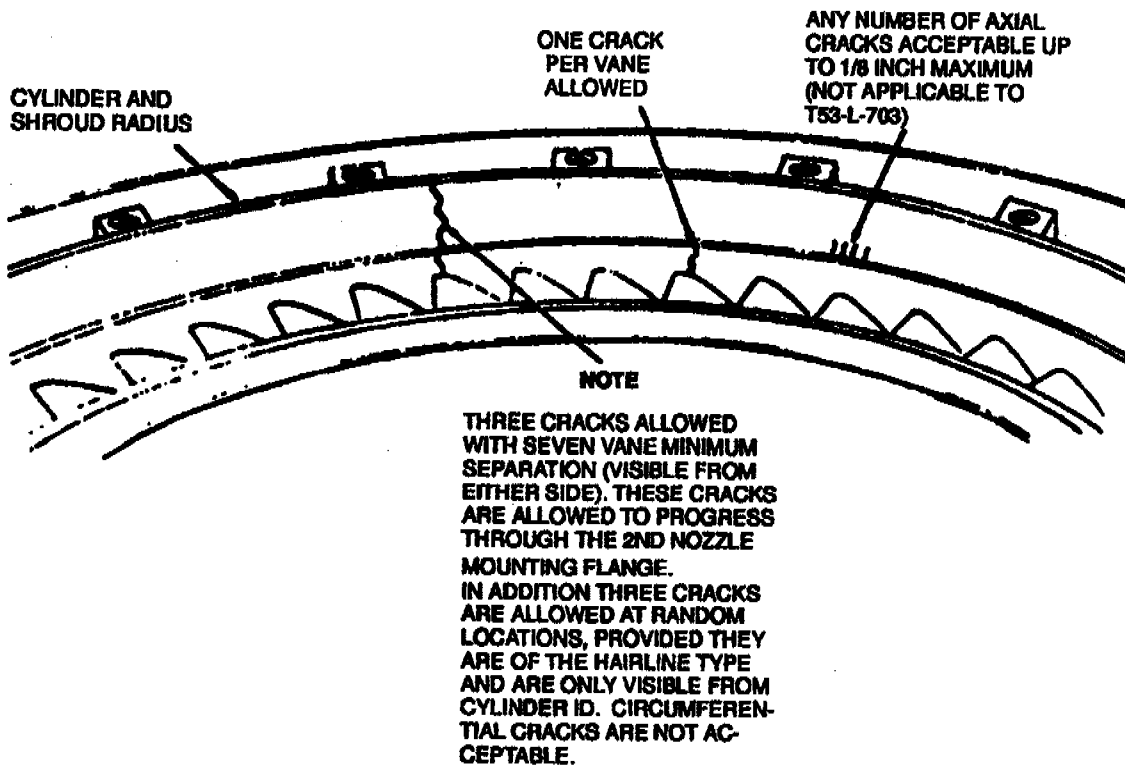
First Stage Gas Producer Nozzle Assembly Outer Shroud and Cylinder Inspection Limits.
